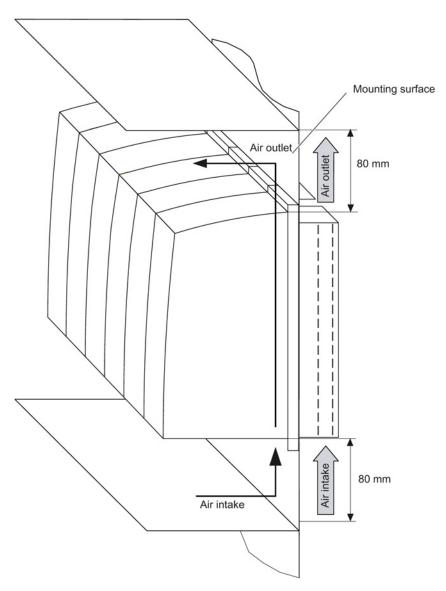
Cooling clearances for a drive line-up with external air cooling (components up to 200 mm width)
